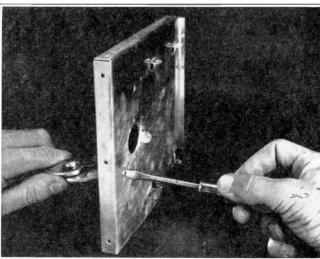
B. Another method of holding a nut with ordinary pliers while tightening a machine screw which is being used for mounting a soldering lug underneath the chassis. The screw should be tightened enough so that the lug cannot readily be moved with the finger.
